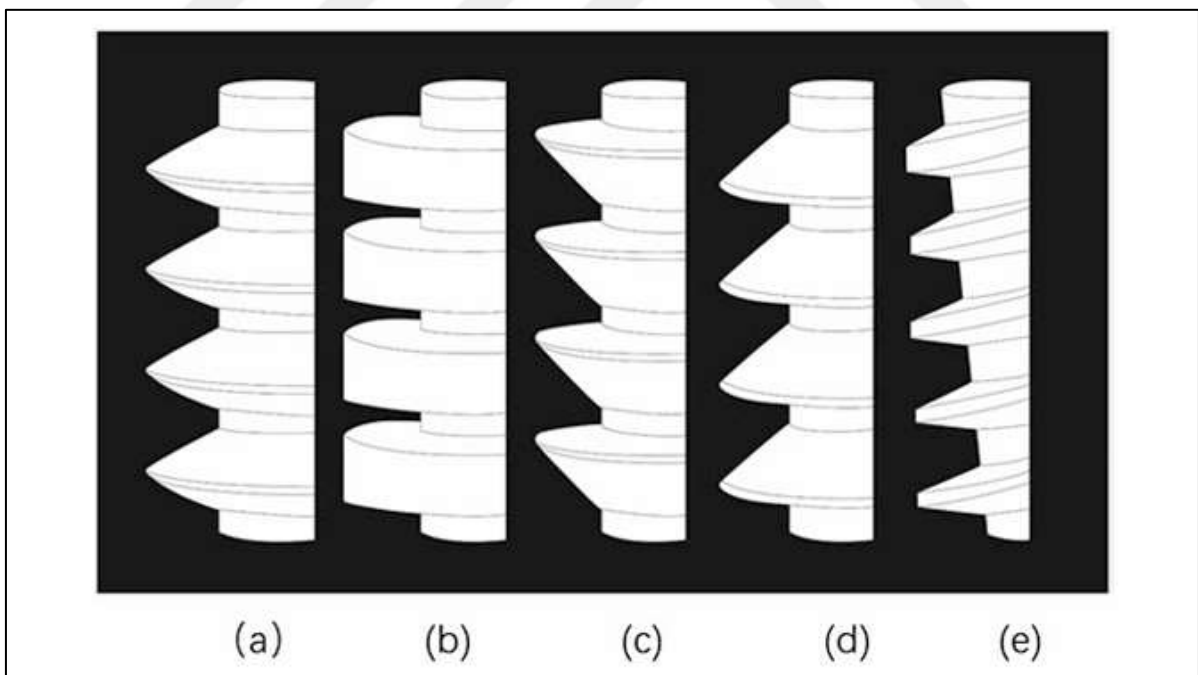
Different Thread Designs: a- Standard V, b- Square,c- Sawtooth, d- Anti-Sawtooth, e- Spiral.
